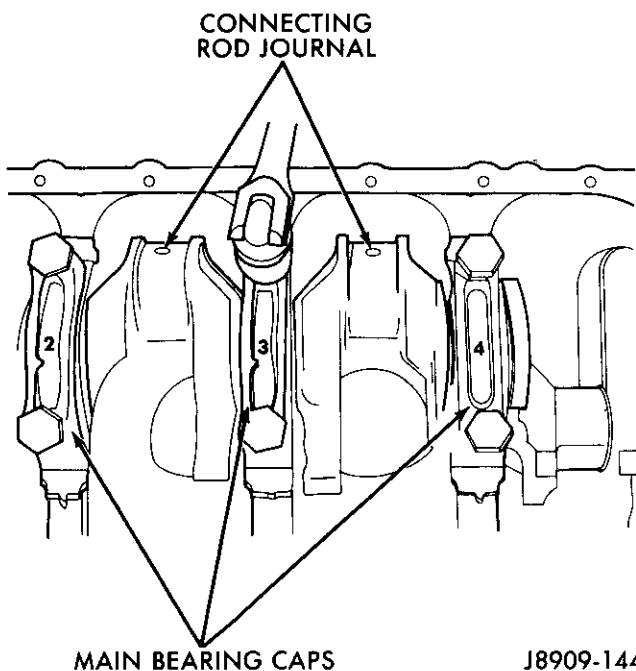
Removing Main Bearing Caps and Lower Inserts
